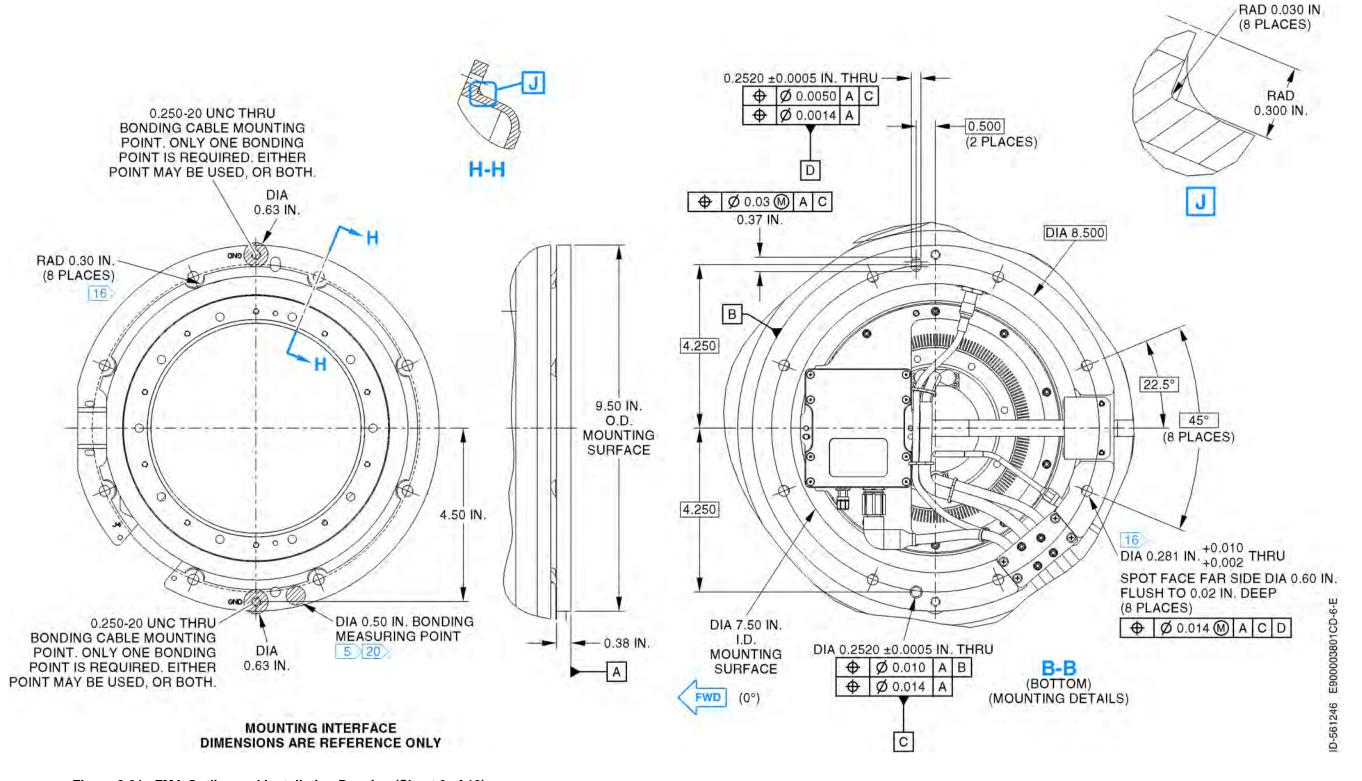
FMA Outline and Installation Drawing (Sheet 6 of 12)
